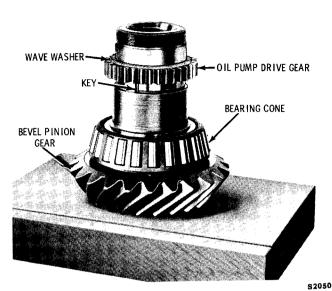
Installing oil pump drive gear and wave washer (VH, VSI series)
